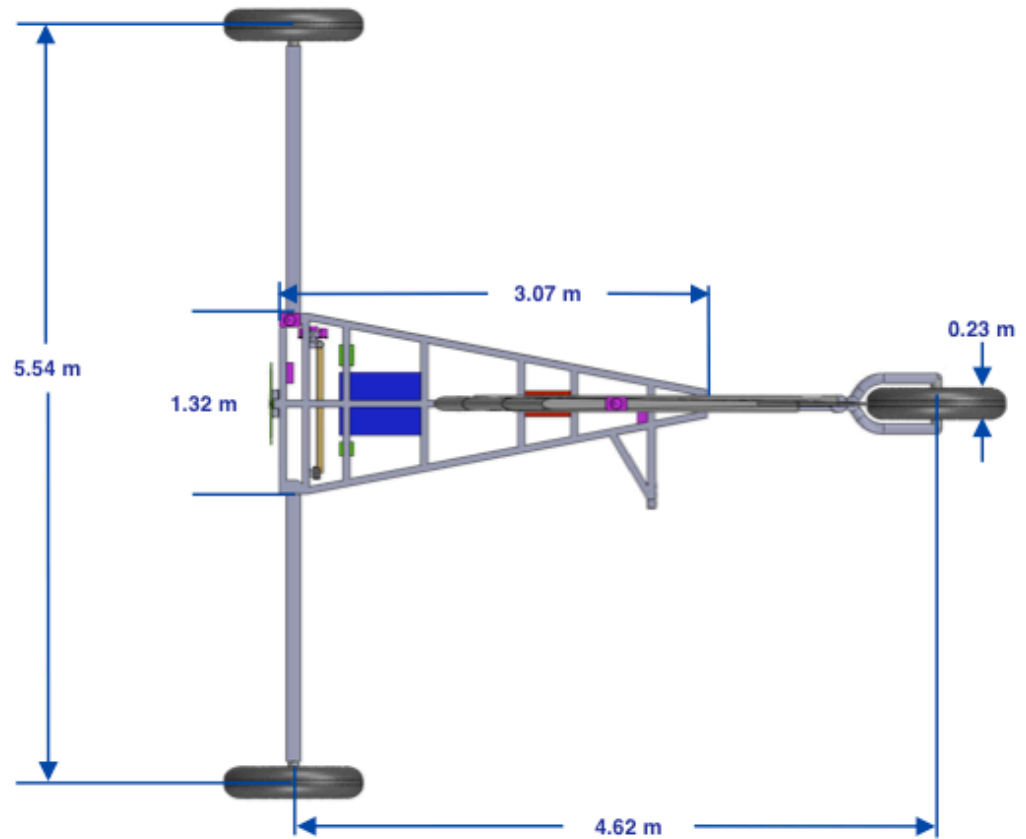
Dimensioned view of rover chassis viewed from below, showing wheelbase.
